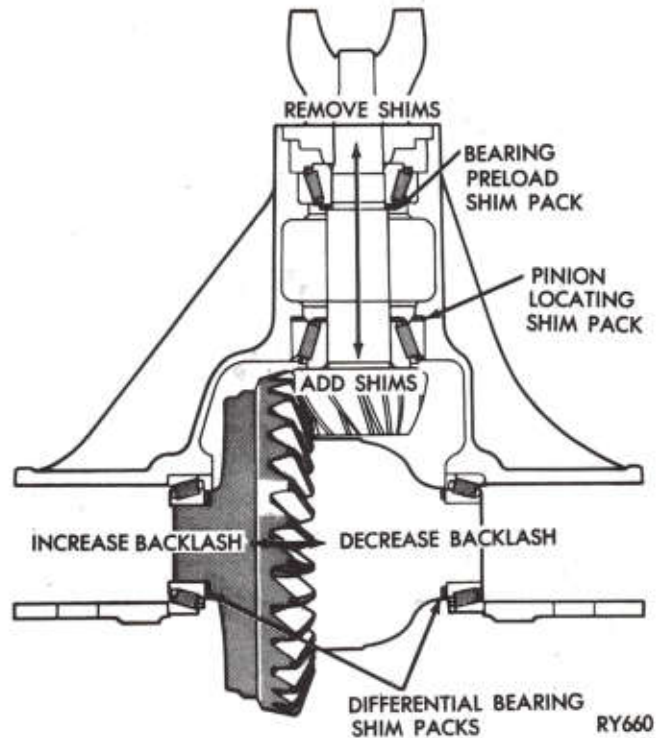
Use of Shims to Adjust Gear Tooth Contact
